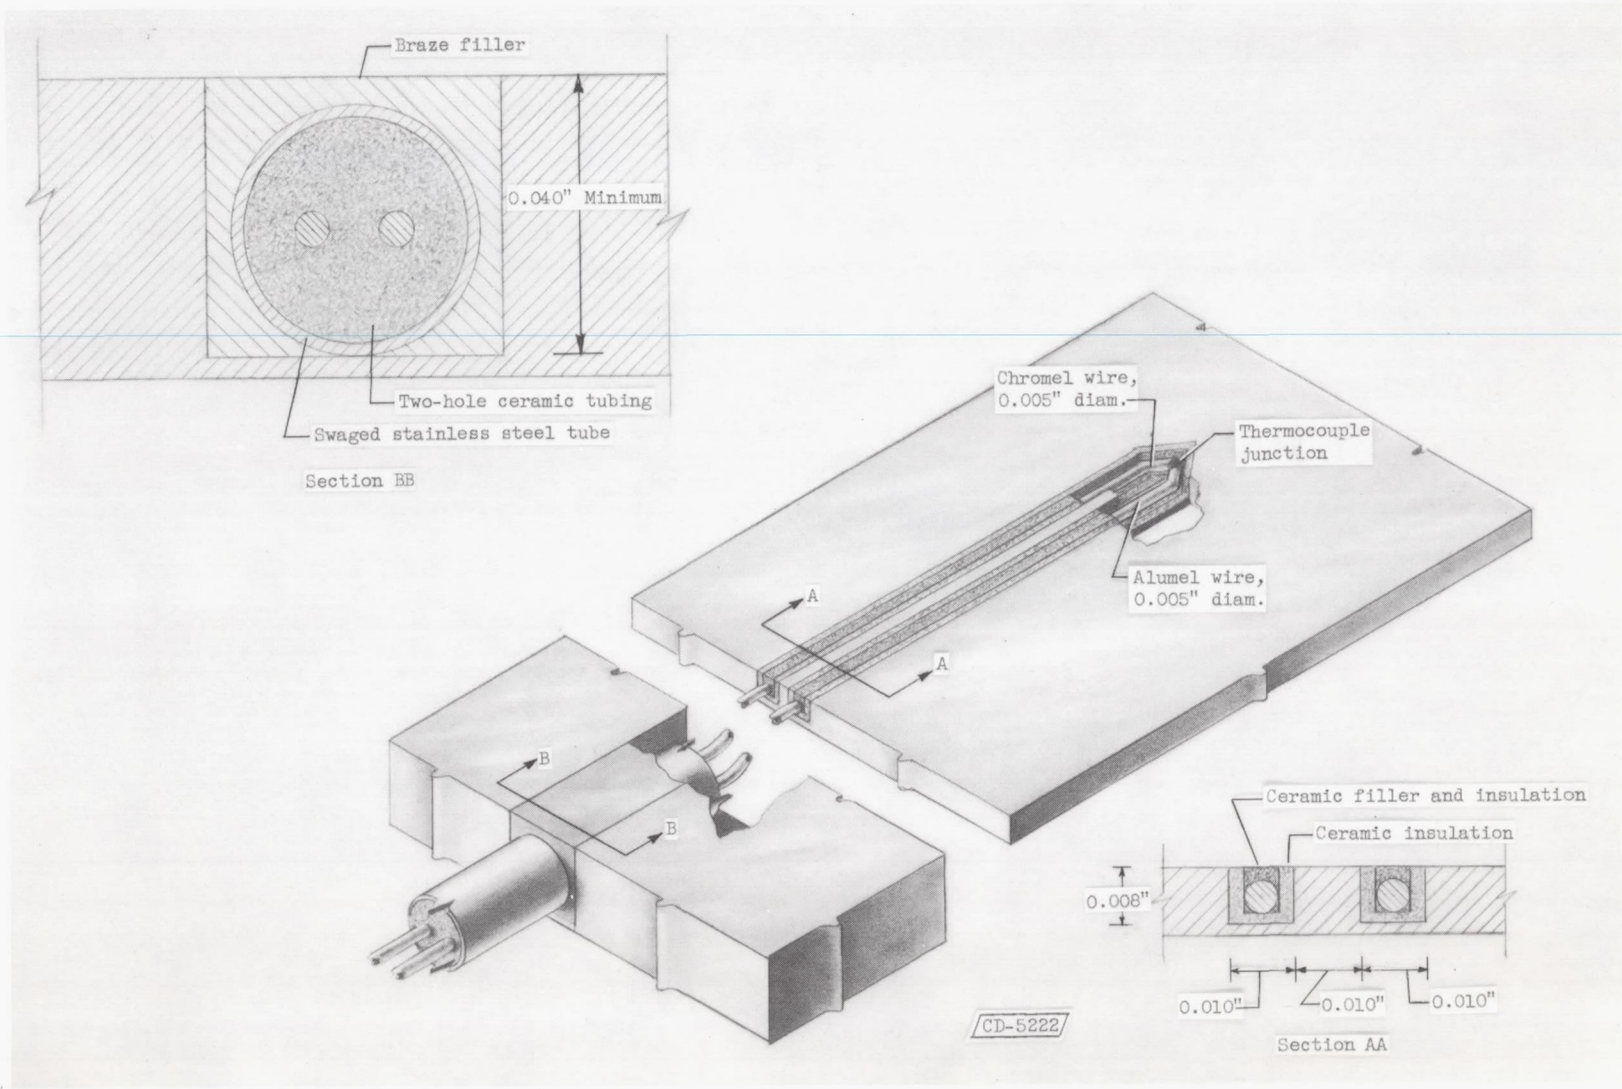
Schematic drawing of thermocouple installed in double groove in thin wall.
